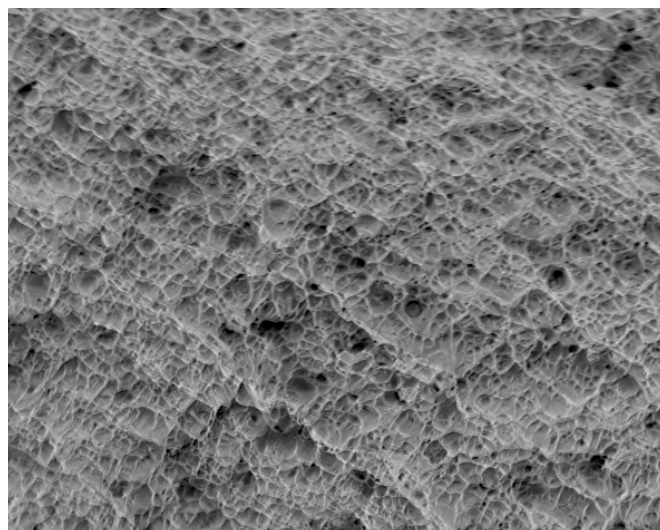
Macrograph from specimen 2.1 showing a ductile fracture after a Charpy V test.
